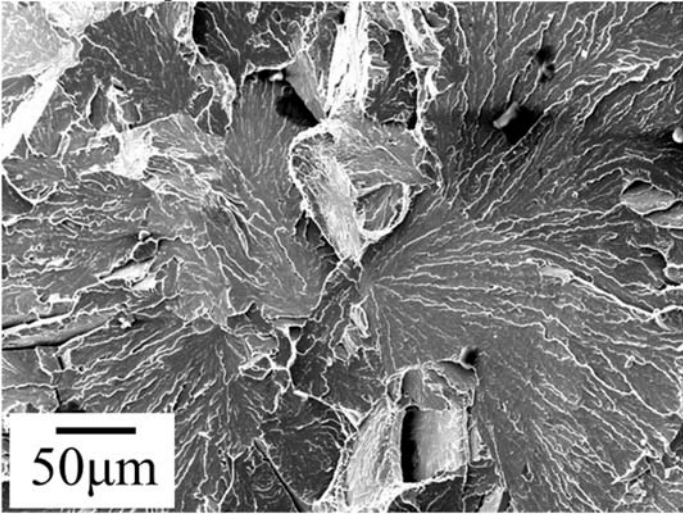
Fracture surface around fracture initiation site (Steel S).
